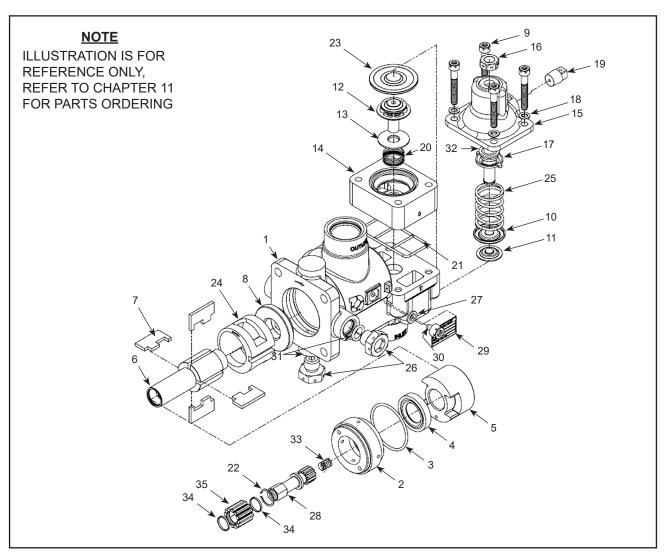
500F-0001, 500F-0002, & 500F-0004 Fuel Pump
